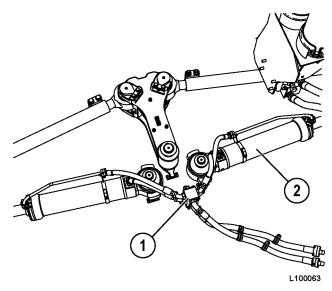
STEERING DISTRIBUTION MANIFOLD
